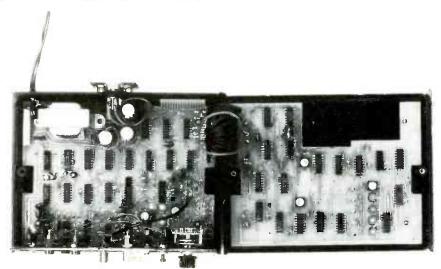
SUGGESTED MOUNTING METHOD of the two boards is shown here in a photograph of the author's prototype.
